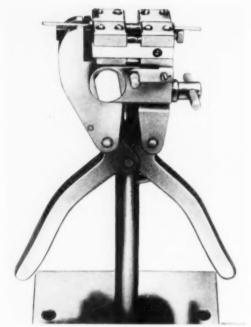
Hand Tool for Butt Welding Wires by the Pressure Method
